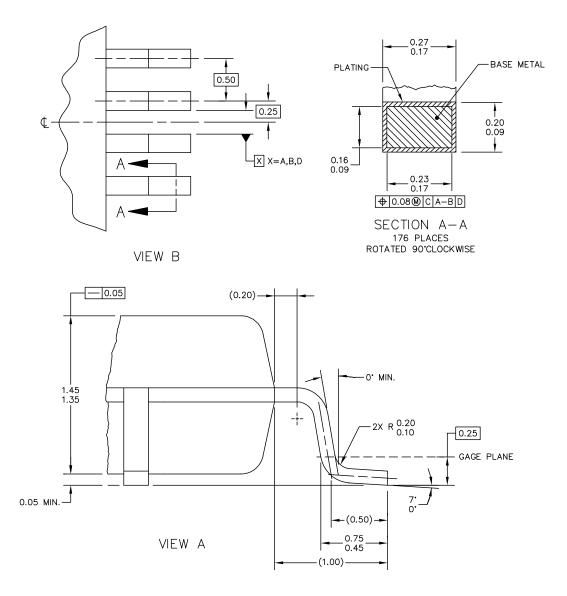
LQFP176 mechanical drawing (Part 1 of 3)
